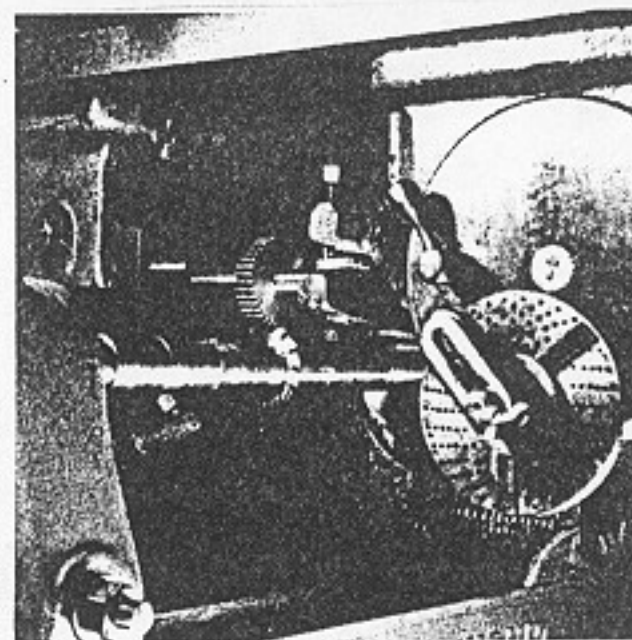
One use of the indexing head is to divide a gear blank into spaces of equal size when cutting a gear at the milling machine.
